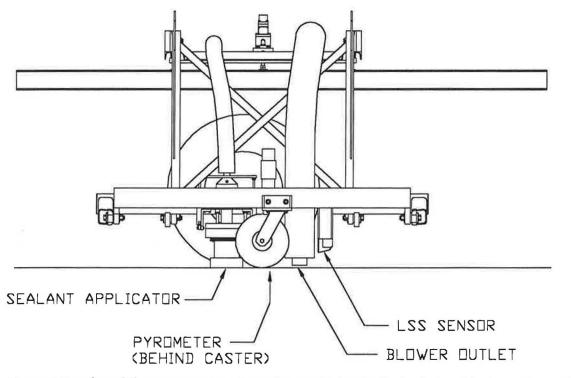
Drawing of the component configuration on the longitudinal robot positioning system without the router.
